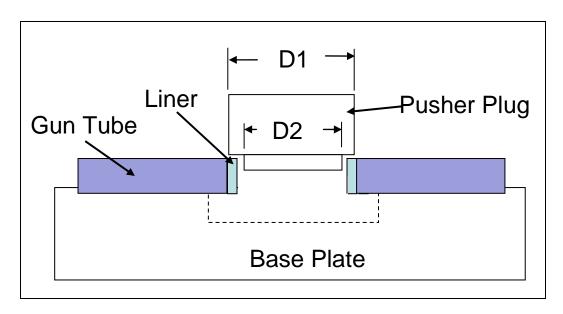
Cross-sectional view of the test fixture showing the placement of the sample to be tested.
